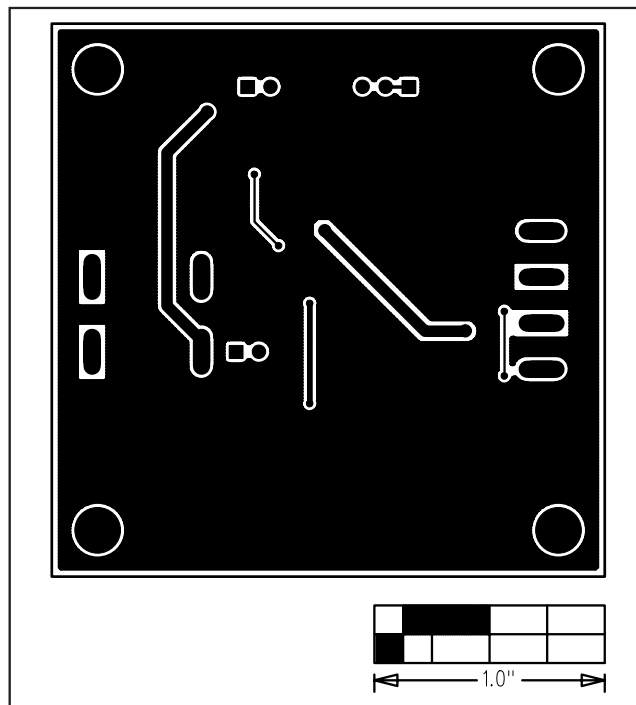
MAX17062 EV Kit PCB Layout—Solder Side
